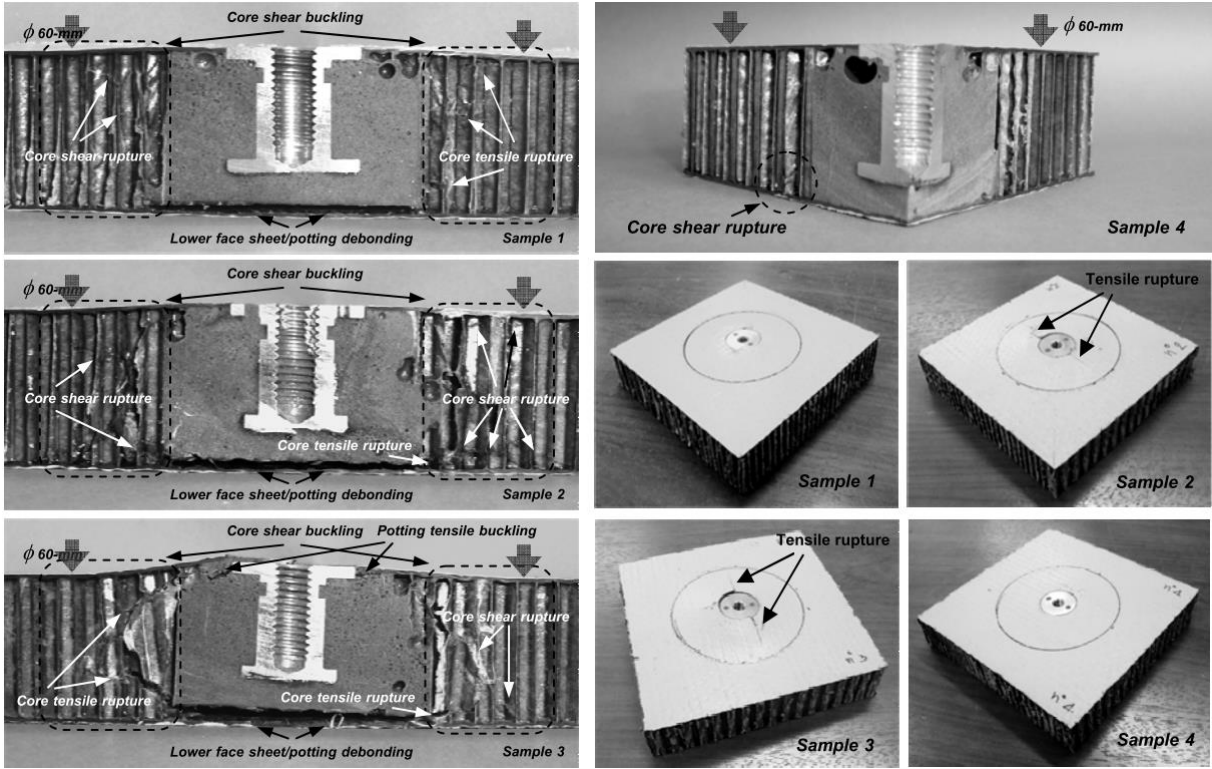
Pull-out test specimens cut in half, several failure modes were detected [48].
